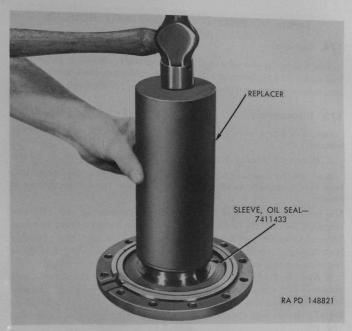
Installing oil seal sleeve on steering knuckle using replacer 41-R-2395-518.
